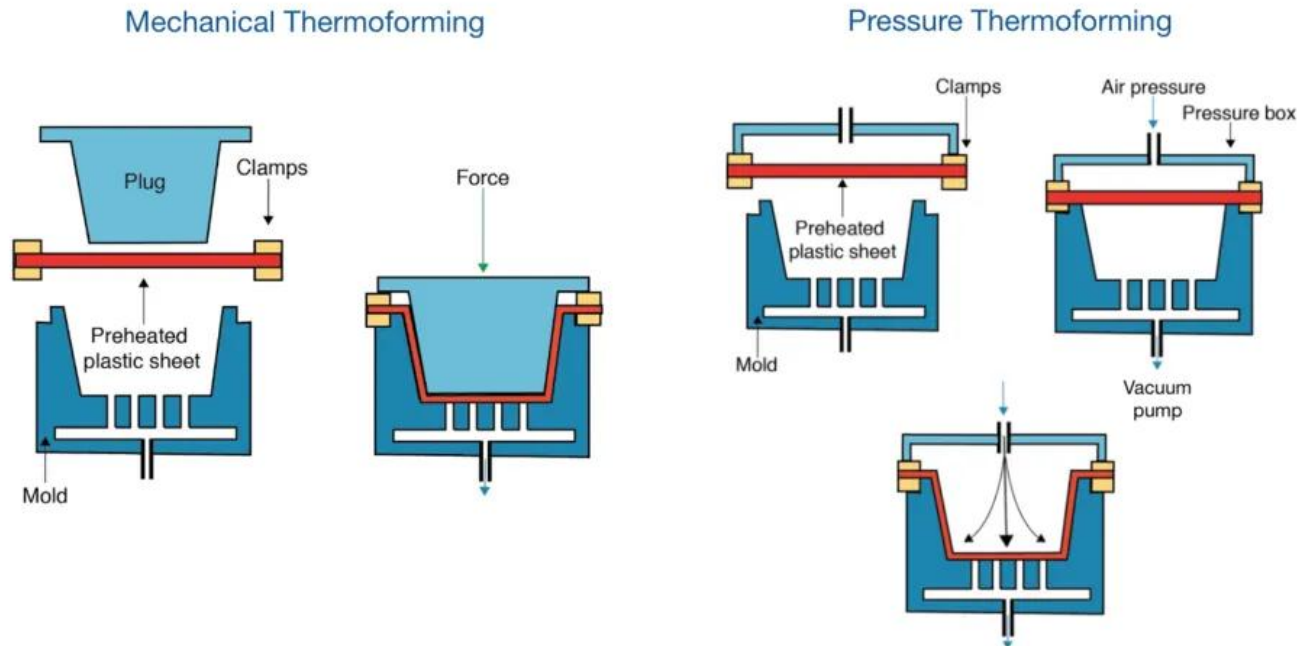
Schematic set-up of Thermoforming Process [24]
